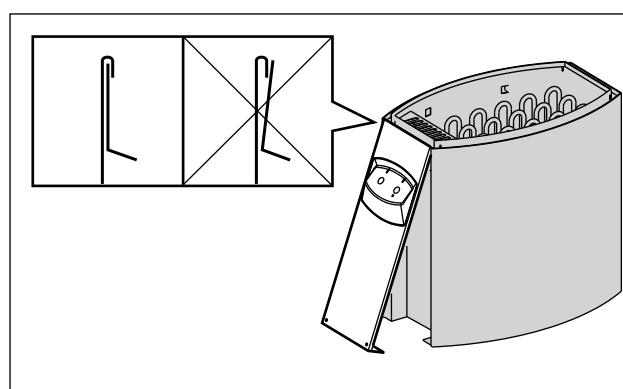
Closing the cover of the connection box (all dimensions in millimeters)
